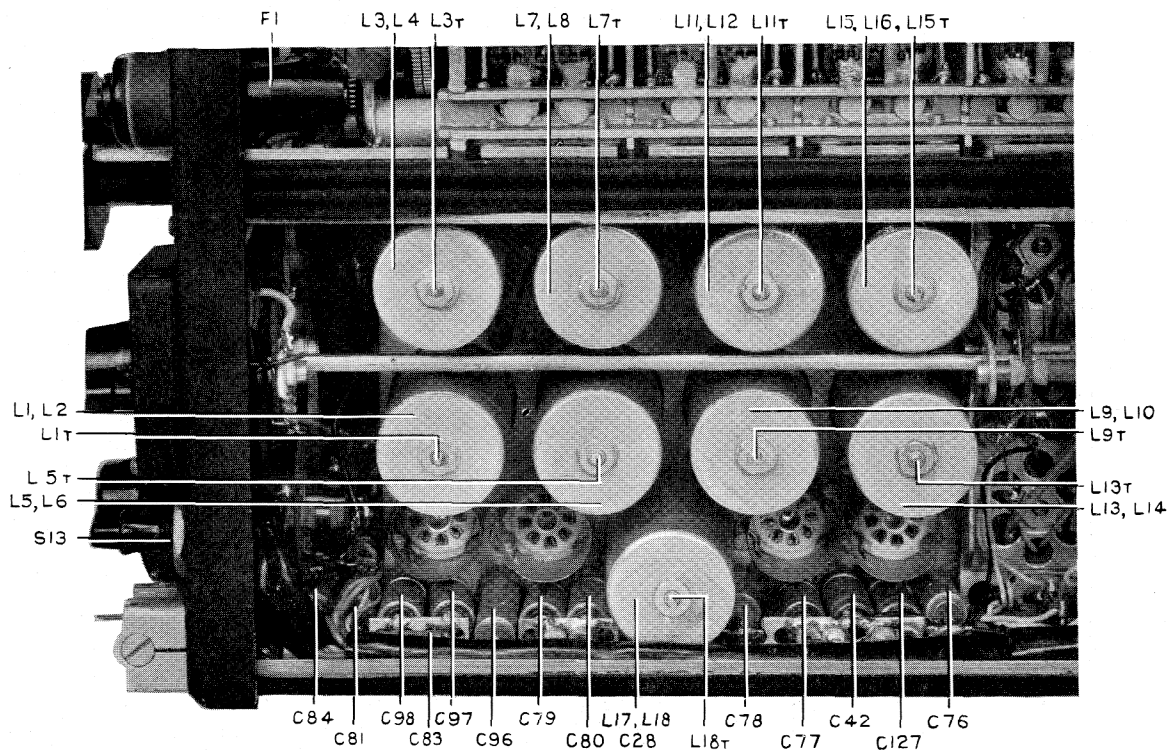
RECEIVER TYPE AD.7092. COMPONENT LOCATION, RIGHT HAND SIDE, LOWER FRONT SECTION (V1-V4 REMOVED).
